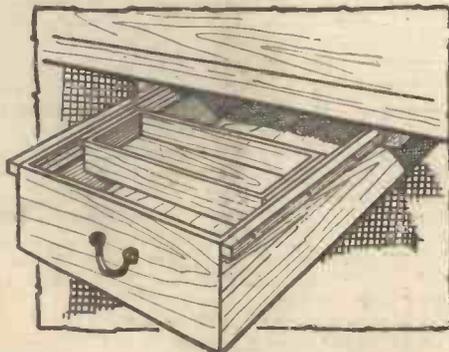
The more delicate tools should be kept together in the sliding tray of the tool drawer.
